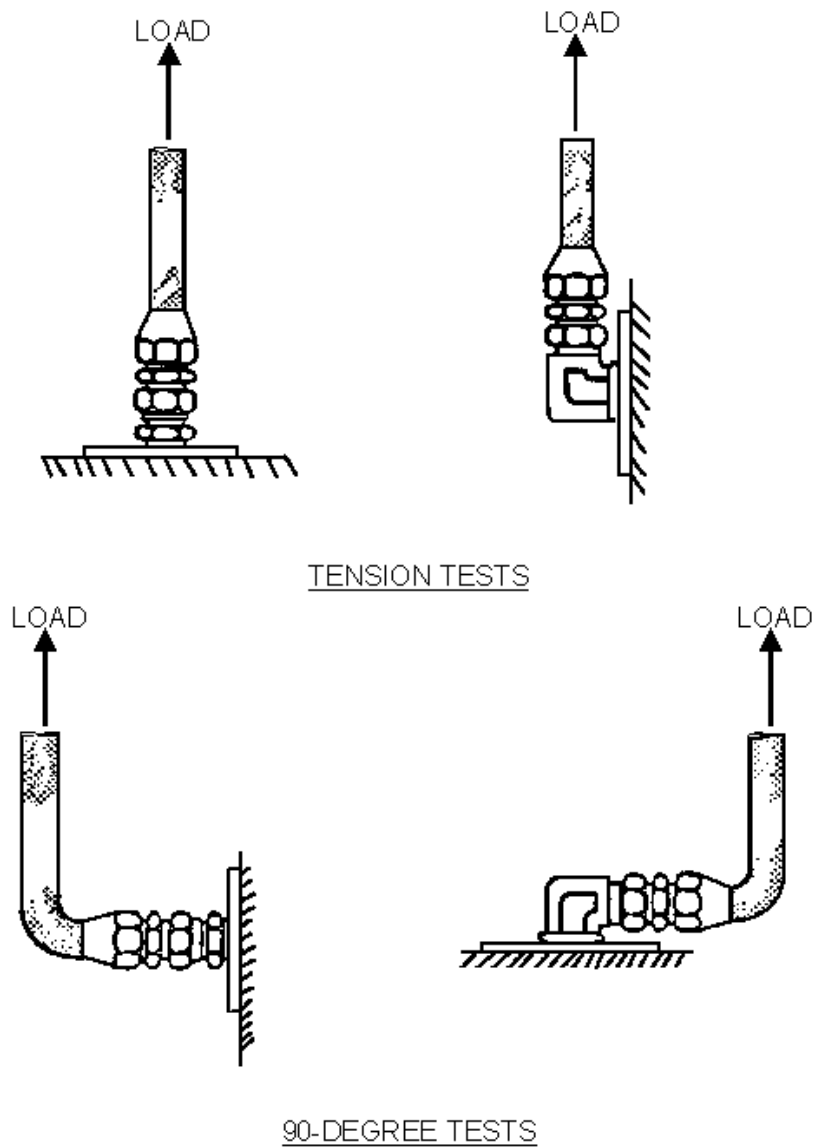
HOSE ASSEMBLY TESTS
